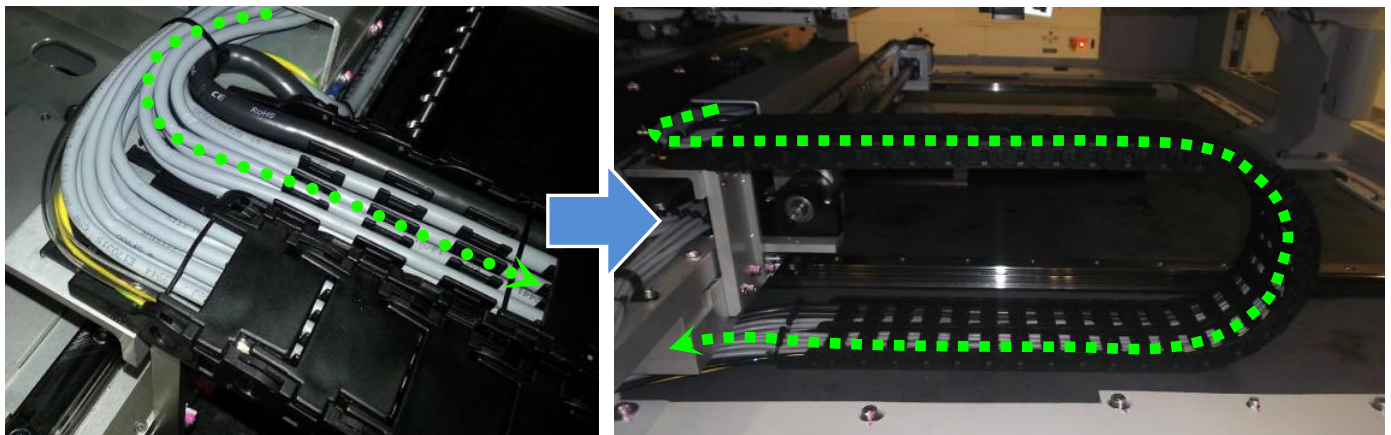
Stepper Motor Cable (Y axis Wide E-Chain)
